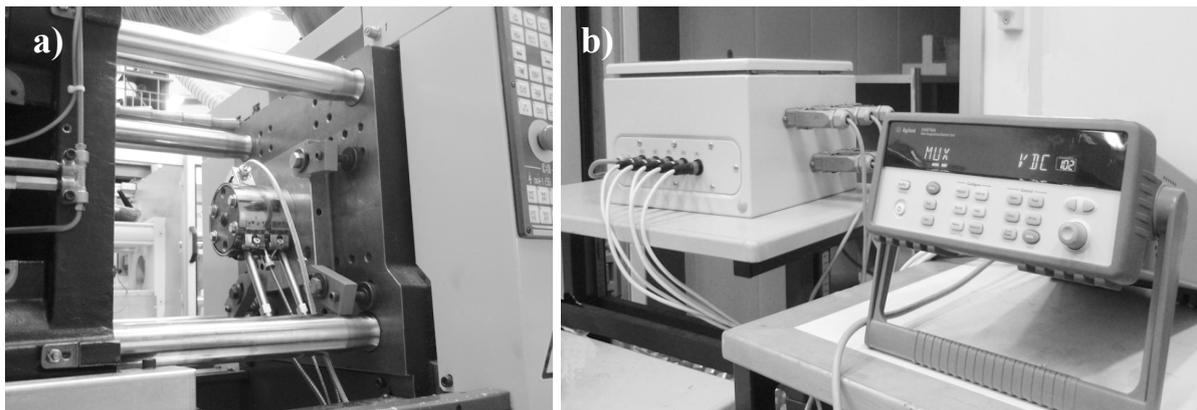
a) Slit die fixed to the mounting plate of the injection molding machine and b) data acquisition equipment
